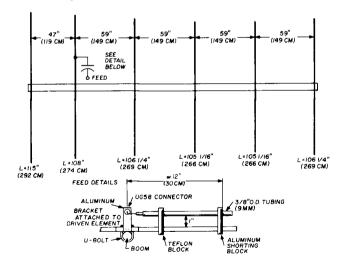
Layout of a 6-element Yagi for 50.1 MHz on a 1.2 λ boom. All elements are ½ inch (13mm) OD aluminum tubing, mounted on insulating blocks attached to a 1½ inch (38mm) OD aluminum boom. The gamma capacitor is approximately 12 inches (30cm) of RG-8/U coaxial cable with the outer jacket and shield removed, then inserted in a 3/8-inch (10mm) diameter tube.
